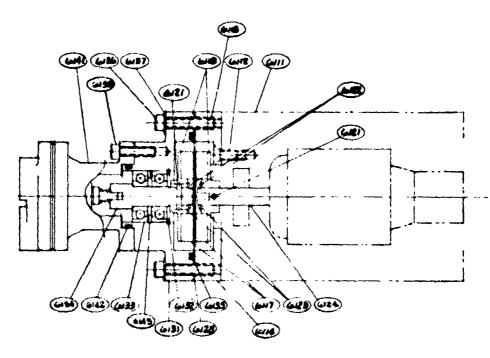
Start Pump, Coupling, Motor Assembly Ref. EP 2659-I 101
